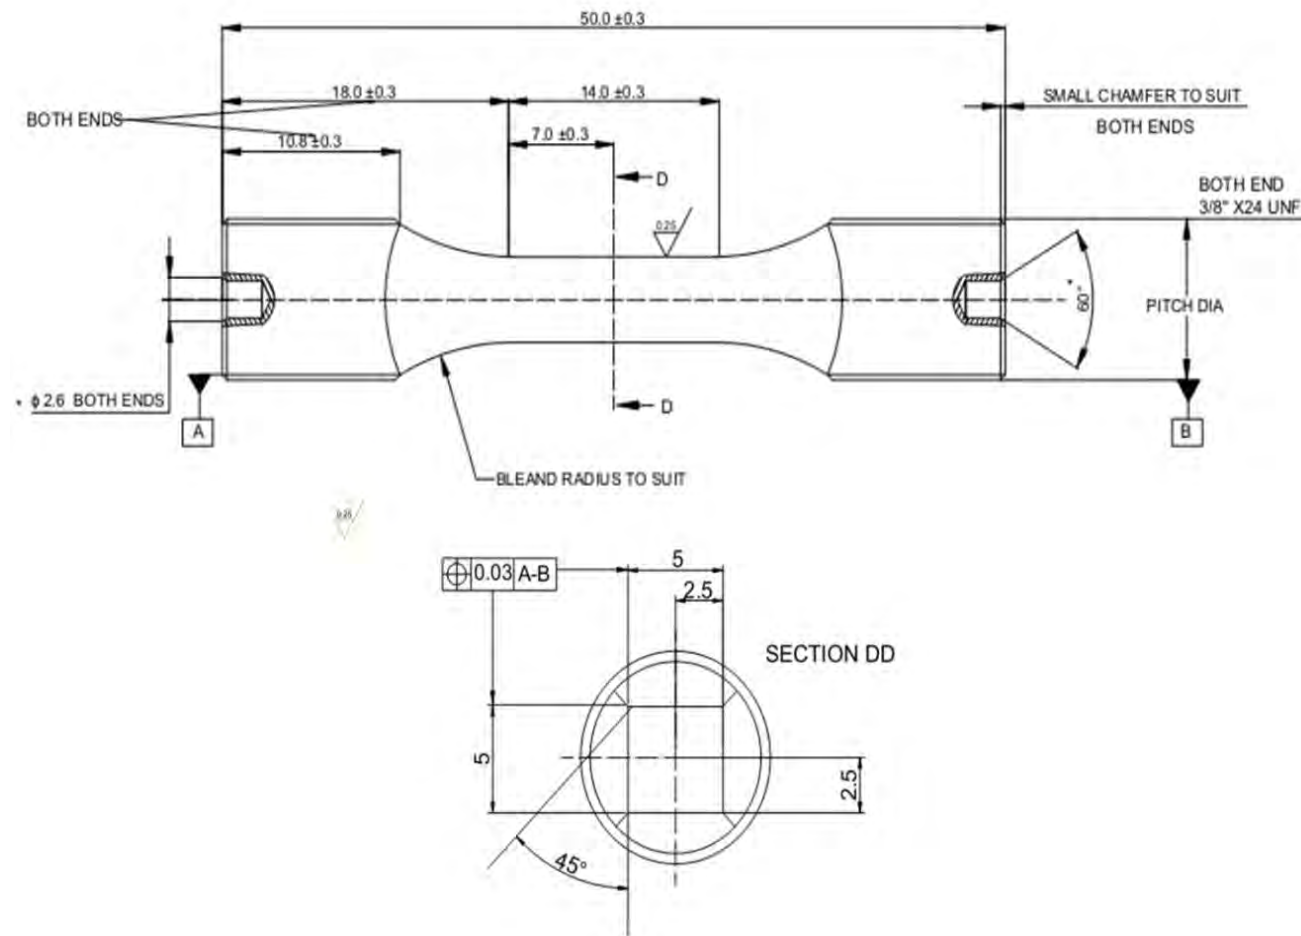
Geometry of corner-crack specimen used for fatigue threshold and crack propagation test modified according to RR drawing RLH5325.
